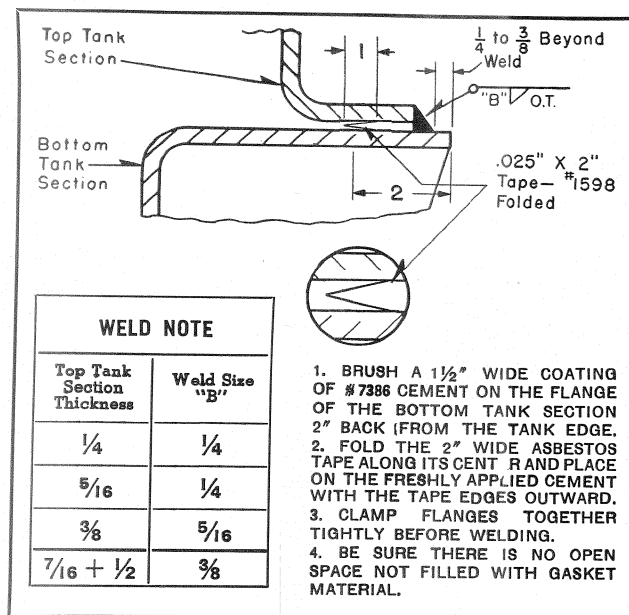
Joining of Flanges, "Form-Fit" Tank
